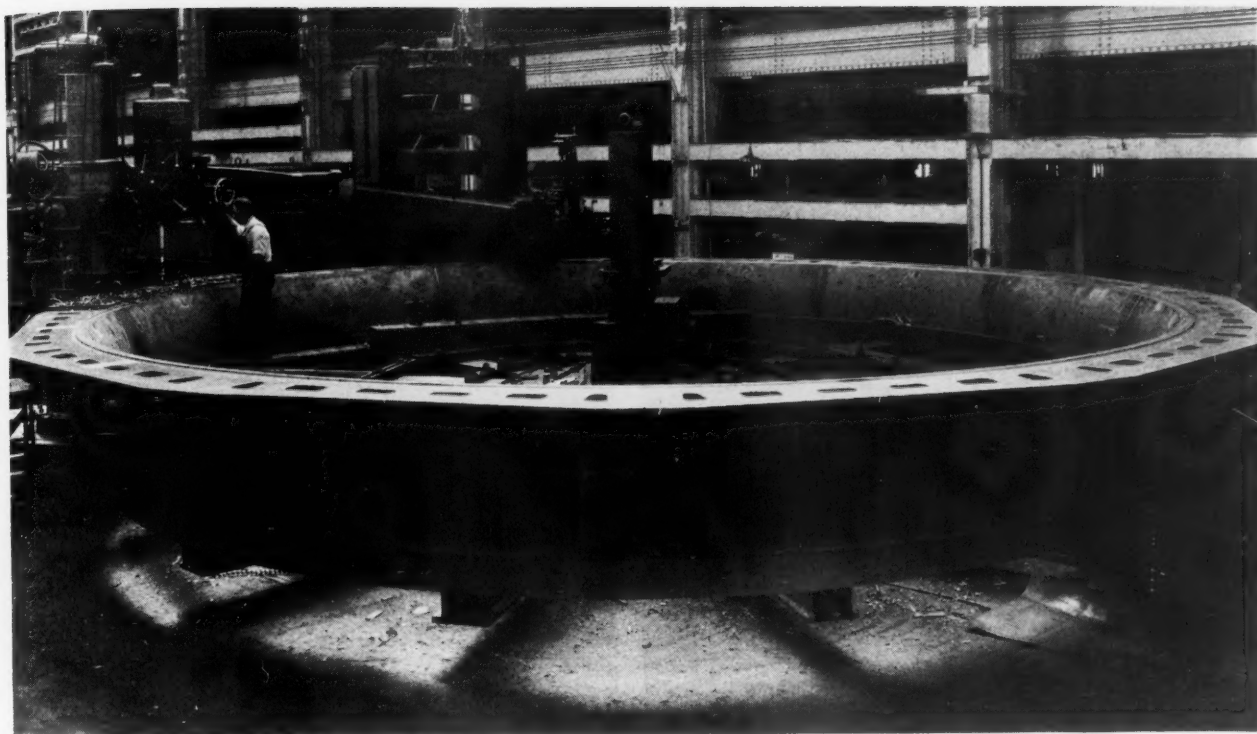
Twenty-eight-foot Boring-mill Table, an Open-side Planer, and a Radial Drilling Machine Arranged for Turning and Drilling the Throat Liner and its Monel Metal Seat
